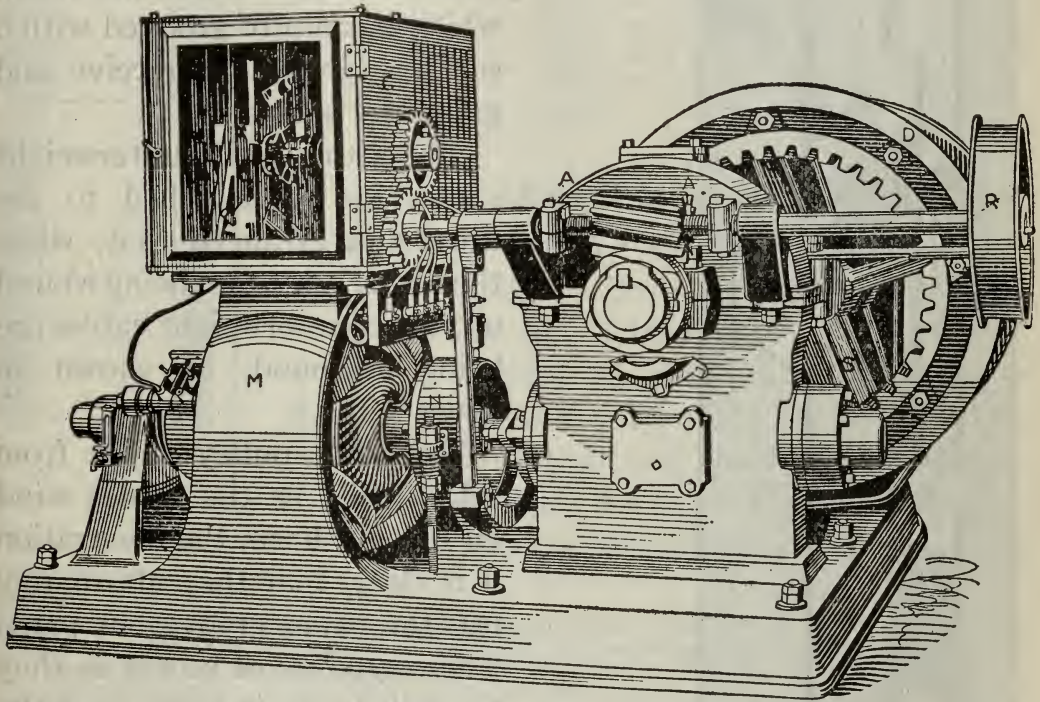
,194.—Warner internal spur gear freight elevator machine, fitted for mechanical control. The gear spider S and drum D are made in one casting with a heavy cast iron neck between them. On top, the motor M, is the controller box C, containing the switches and rheostat. N, is the brake, R, shipper pulley, and A A, the limit stop.
